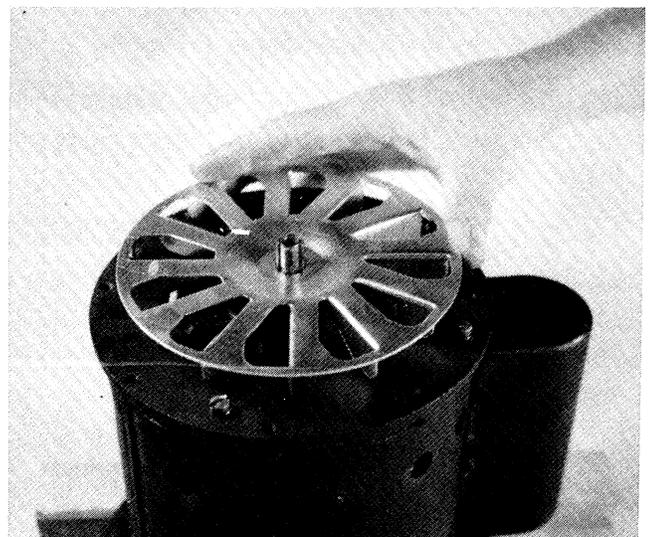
Testing for Play between Motor Fan and Motor Shaft
